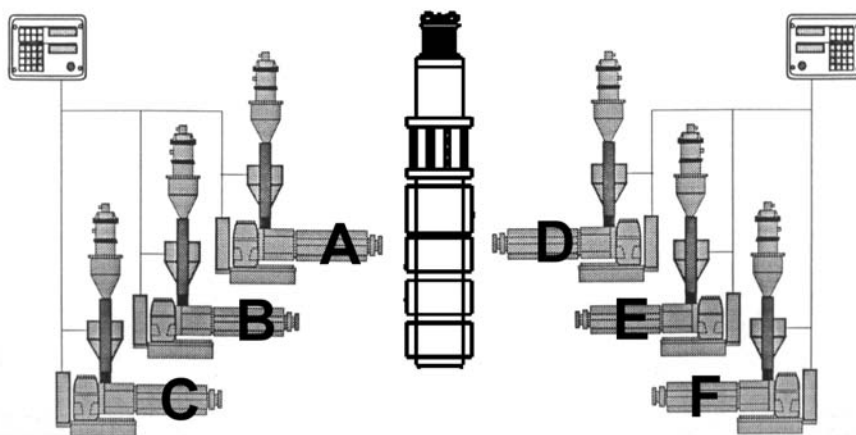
Parison manipulation/segmented mould. Co-extrusion of a 6-layer filler pipe with pinch-off
